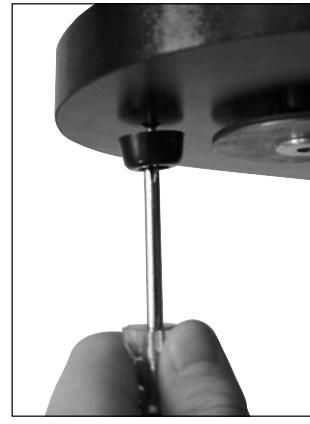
Install the bumper into the pilot hole above the altitude encoder assembly.
